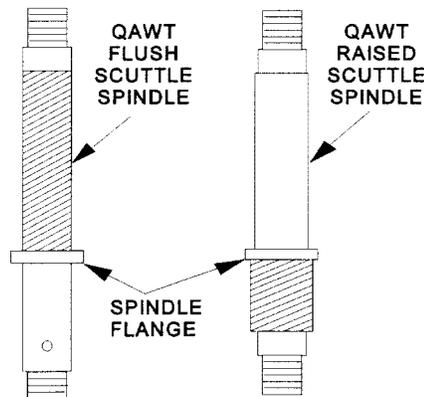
Quick-Acting Watertight Scuttle Spindles
